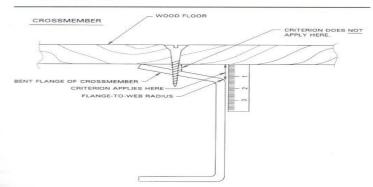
/Measuring separation of crossmember flange from floor (at point on flange adjacent to formed radius). See Section 4.8.5.
